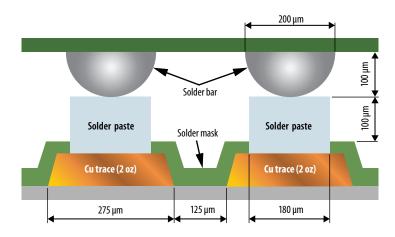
Cross section of a representative PCB mount using EPC2001C (Pre-reflow).
